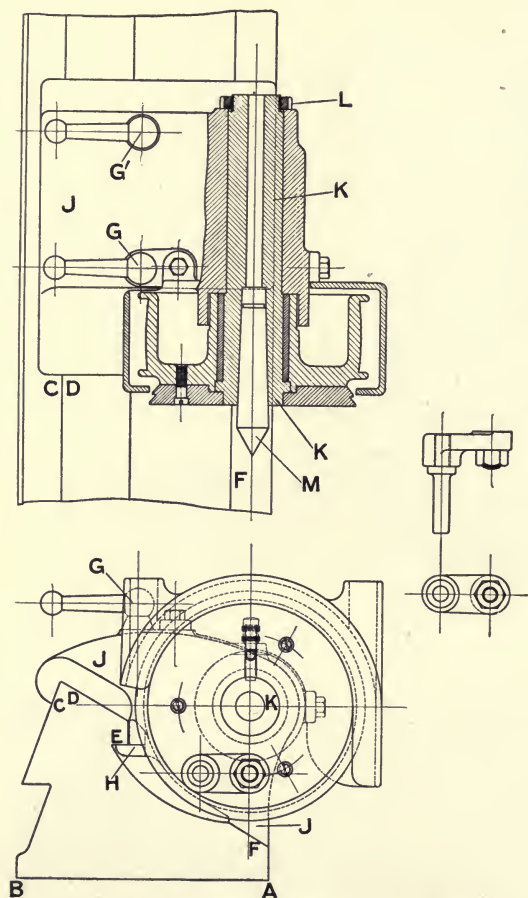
PLAIN GRINDER, WORK HEAD—CHURCHILL
